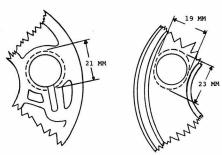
Rotary Valve cover should be modified by enlarging intake passage to 21 MM on the outside and tapering the hole to a 19x23 MM hole on the inside of the cover. Modify intake on crankcase to match rotary valve cover.
